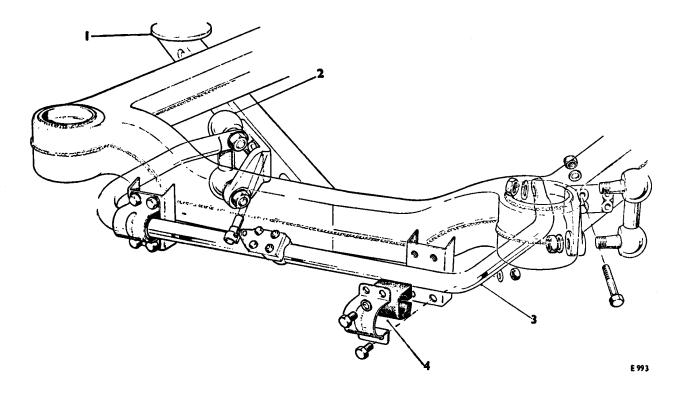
EXPLODED VIEW FRONT STABILISER BAR
